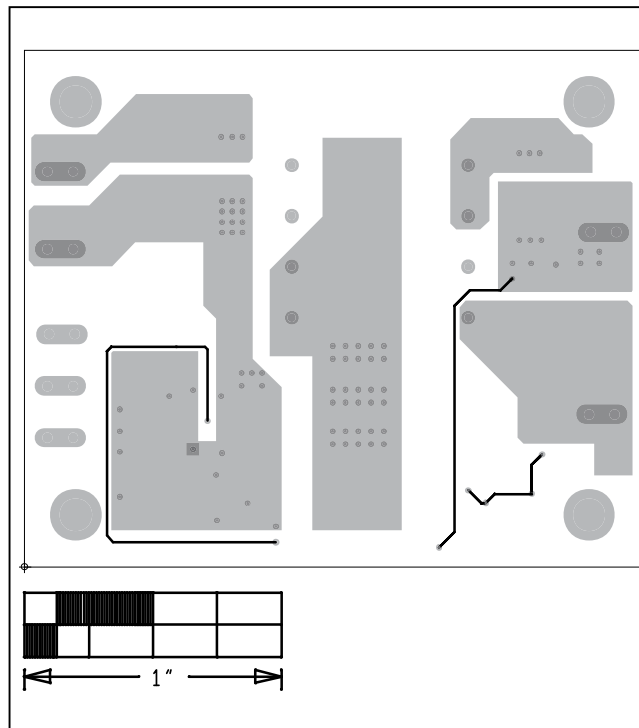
MAX17596 EV Kit PCB Layout—Solder Side
